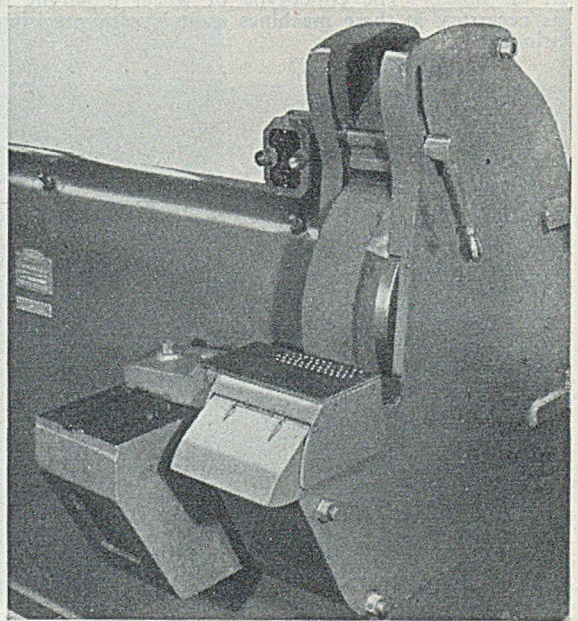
Similar Grinder to that of Fig. 1, but with a Wheel worn down to 20 in., and the Tool Rest adjusted to suit.
